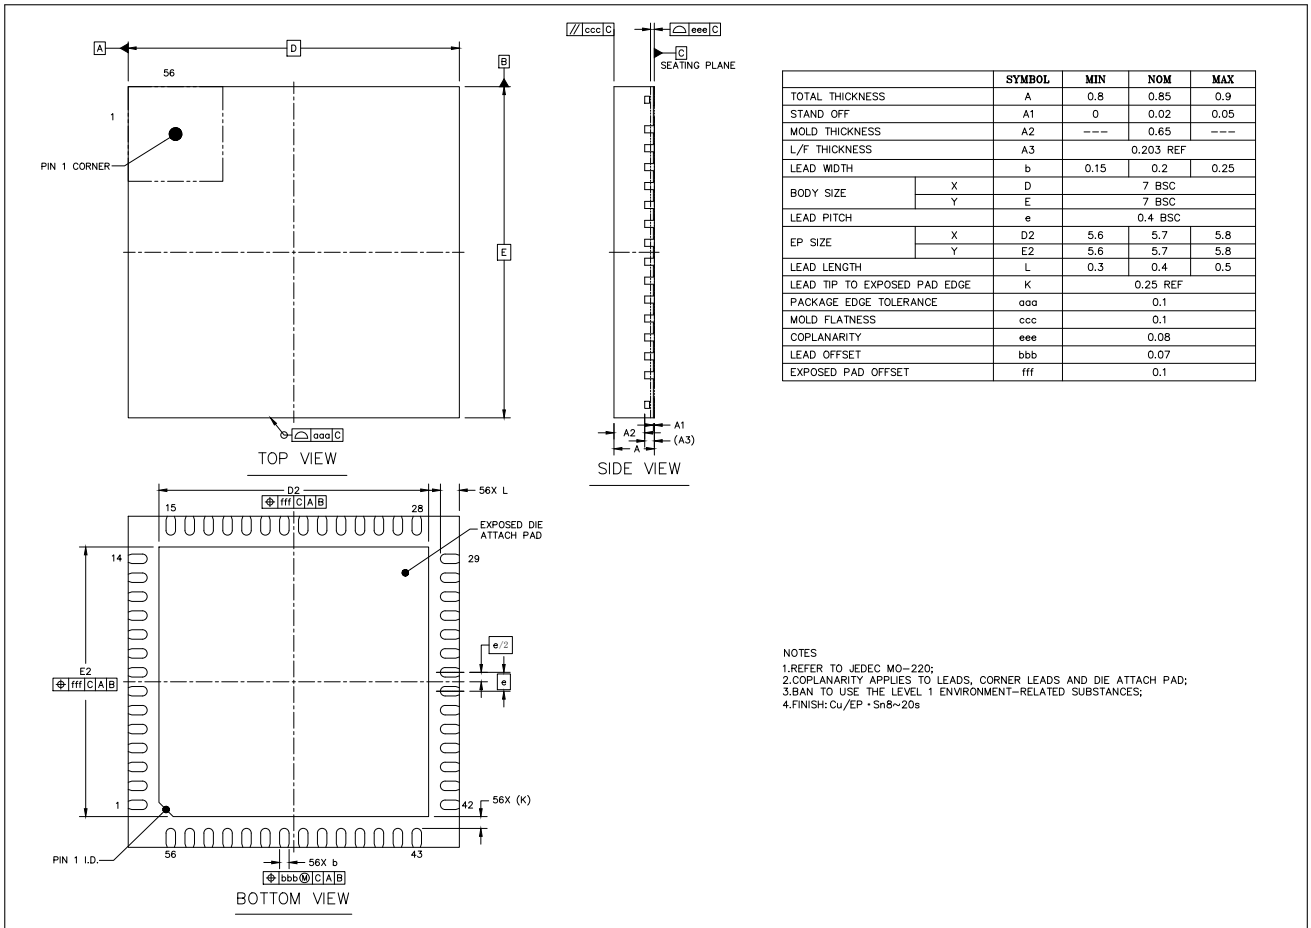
QFN56 (7x7 mm) Package (Only for ESP32-S3FH4R2)
